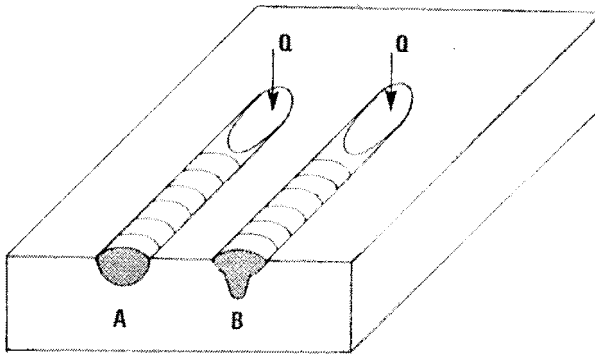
Cross-sectional weld shape of the fusion zone where a double ellipsoid is used to approximate the heat source (A), compound double ellipsoids must be superimposed to more accurately model such welds.
